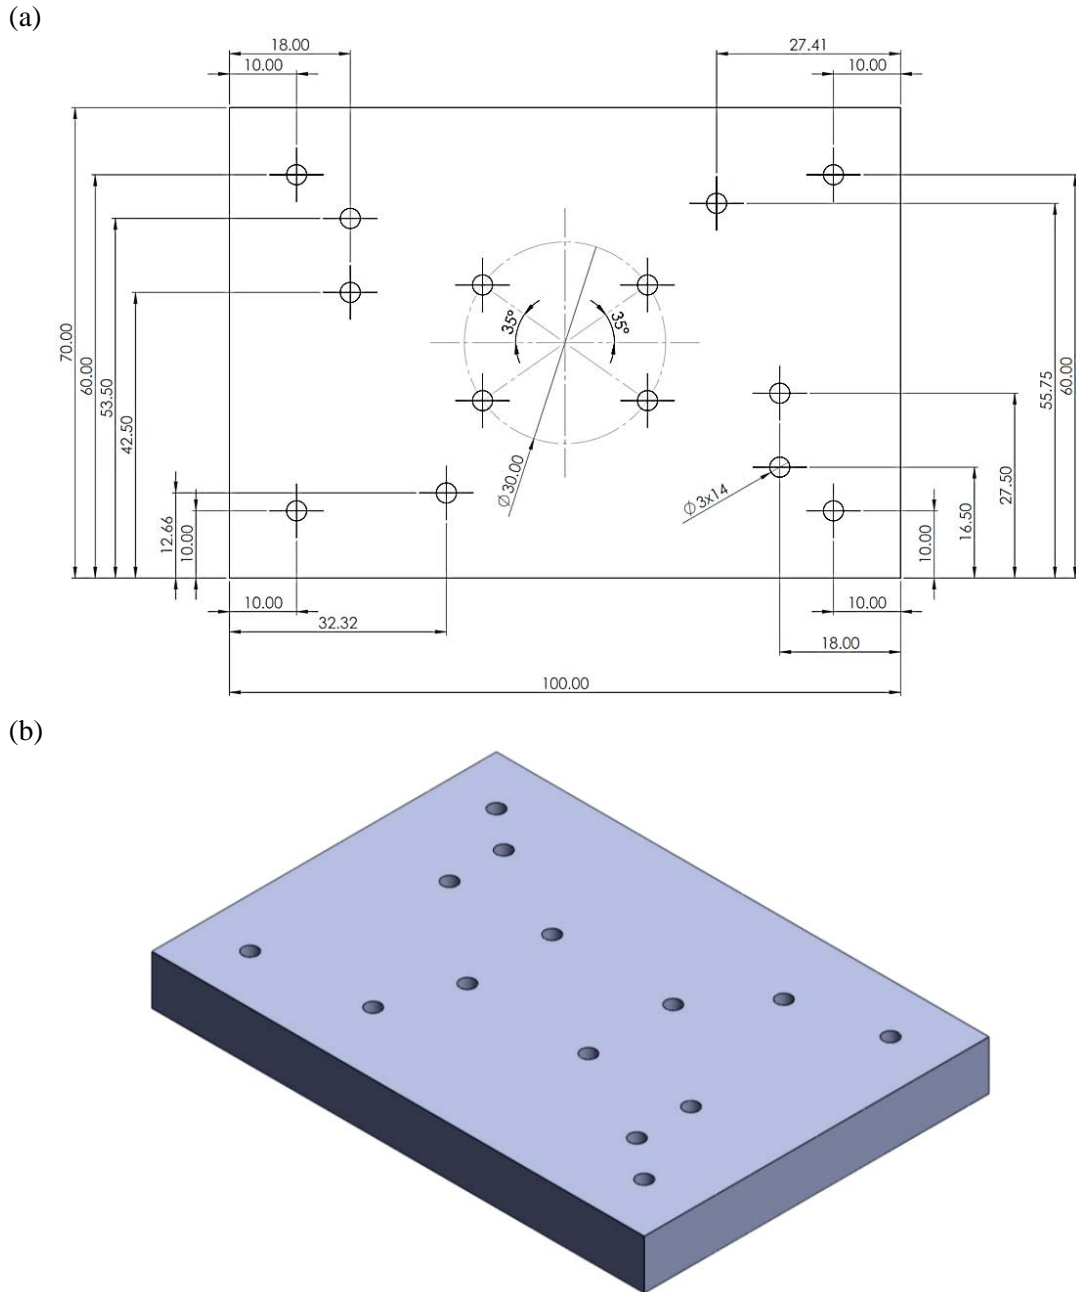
14-hole drilling workpiece dimensions and arrangement of holes (a) 2D drawing; (b) Isometric view (all dimensions are in mm)
